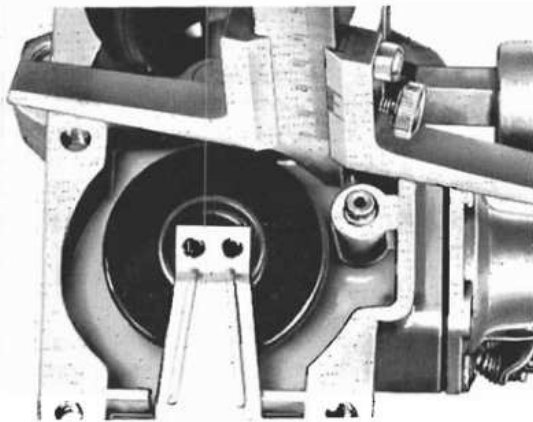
Throttle valve fast idle opening being adjusted. Feeler gauge is inserted between throttle valve and throttle body. Connecting rod adjusting nuts are at A.
